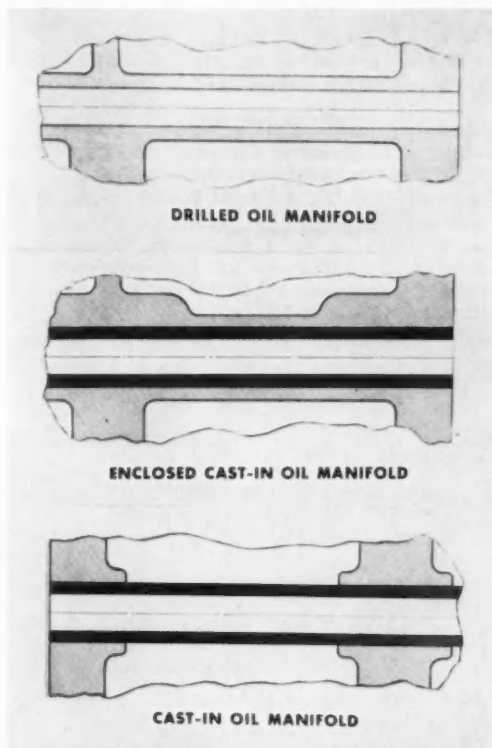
Iron was originally cast around the steel tube oil manifold in the cylinder head at junction points where holes were to be drilled. Current design calls for encasing the entire tube in cast iron. New drilling techniques may usher in a drilled oil manifold.
